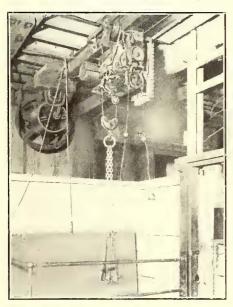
Boston Elevated Shops—Electric Hoist Between First Floor and Shop
